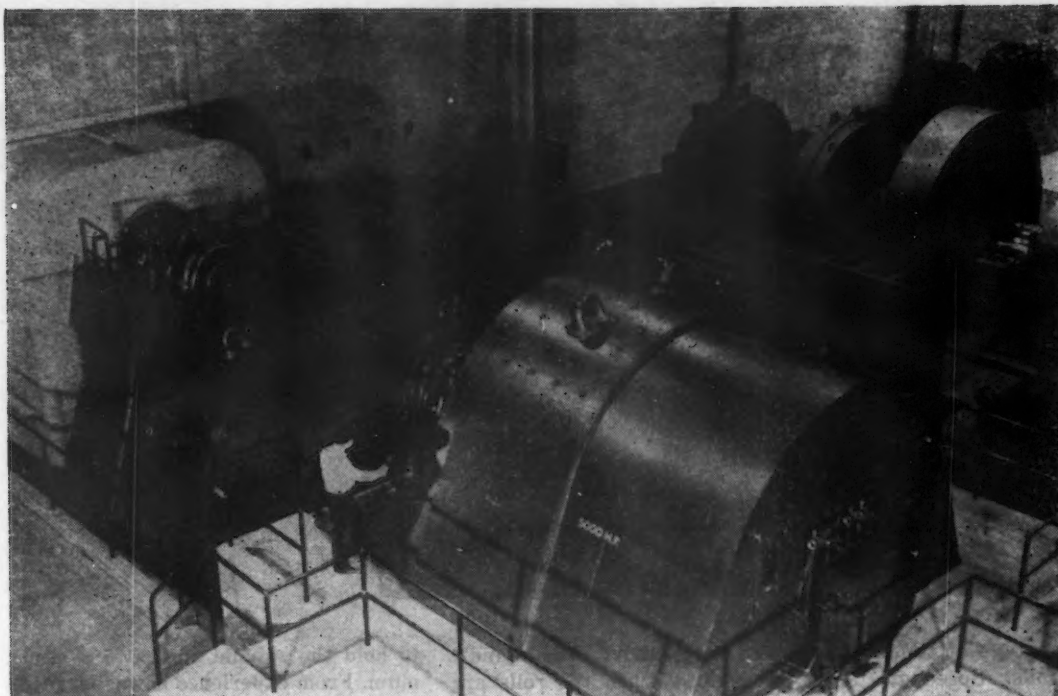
These two 5000-hp main roll drive motors comprise the first twin-motor drive in the U. S. for a plate mill. Westinghouse reversing motors are installed in the motor room of the 160-in. four-high, reversing plate mill at Homestead works of Carnegie-Illinois. The mill is U. S. Government-owned, but operated by Carnegie-Illinois.
